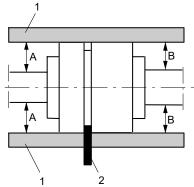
Non-spacer-type coupling, checking the coupling alignment
